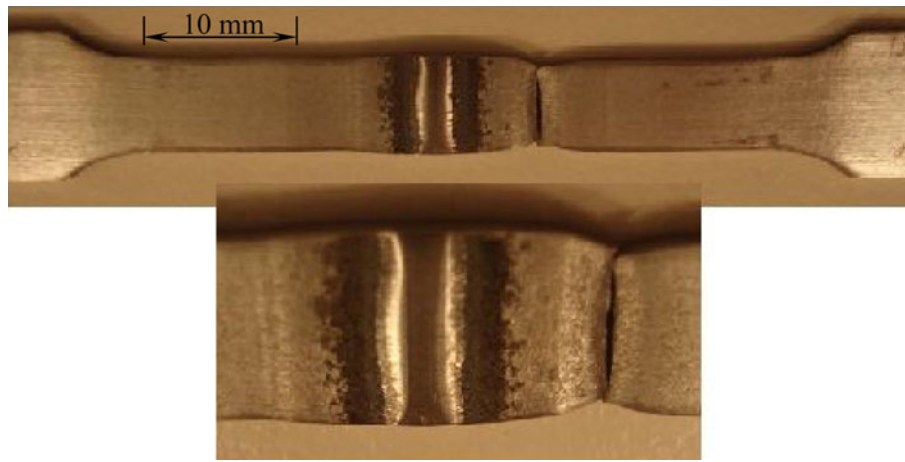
A typical failed sample after the tensile test for the laser-welded DP980 steel joint
